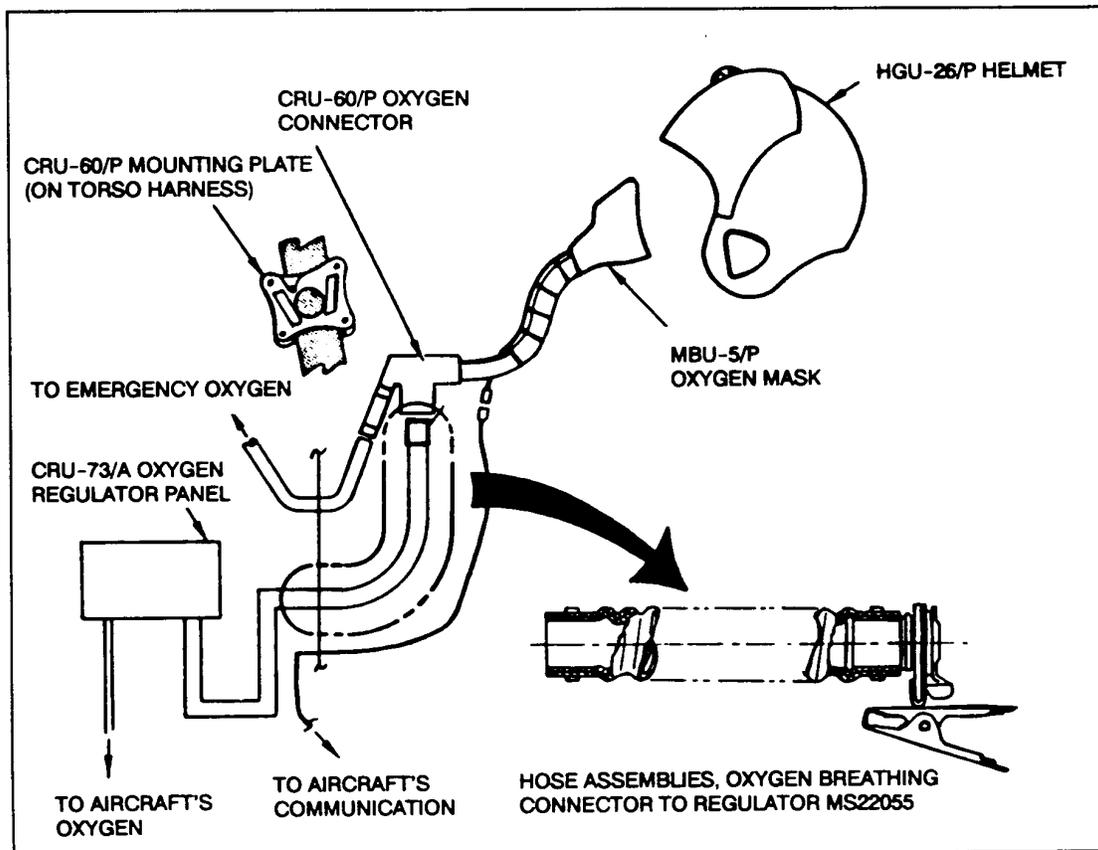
Typical oxygen hose assembly with hose cutaway shown at left.
